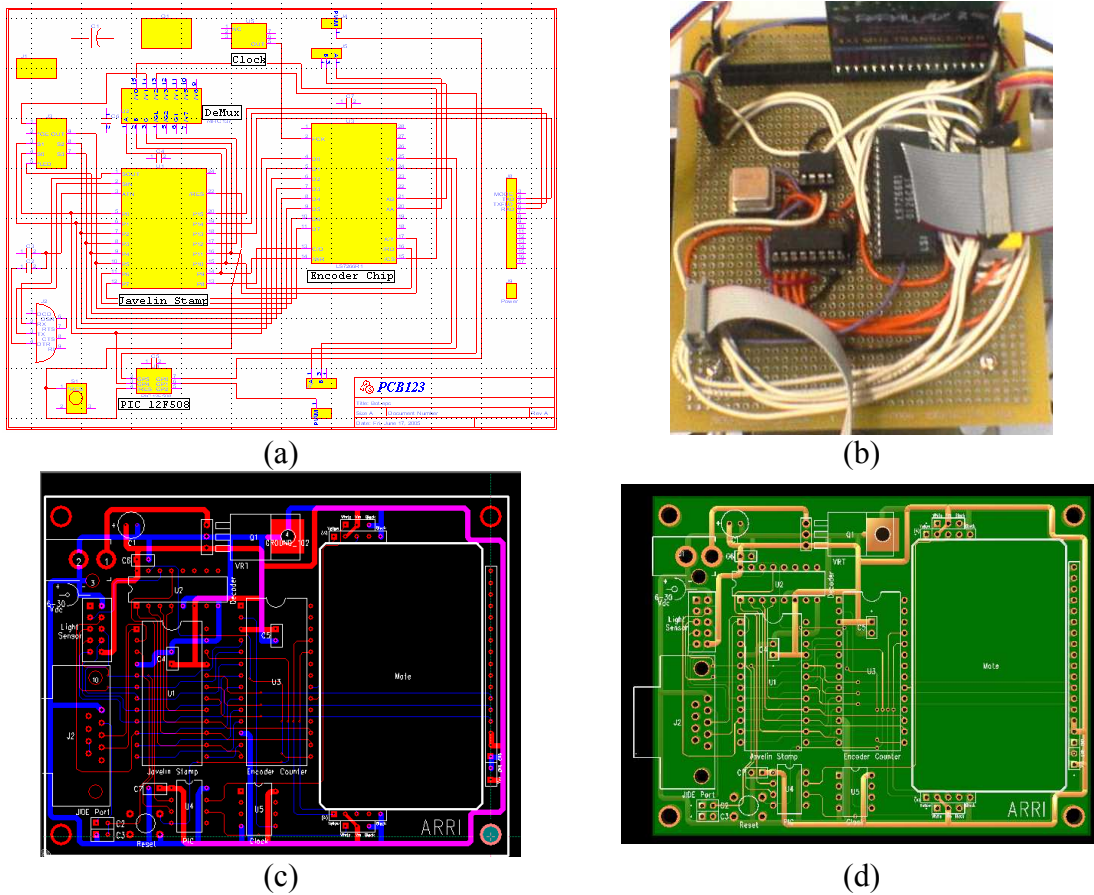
Design of the electrical circuit. (a) Schematics, (b) Prototype, (c) PCB layout, and (d) Fabricated PCB.
